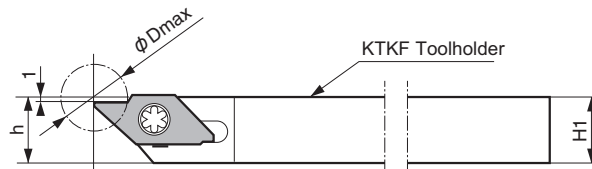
When a TKF-AS insert is attached (The cutting edge is 1 mm lower than the center line.)
